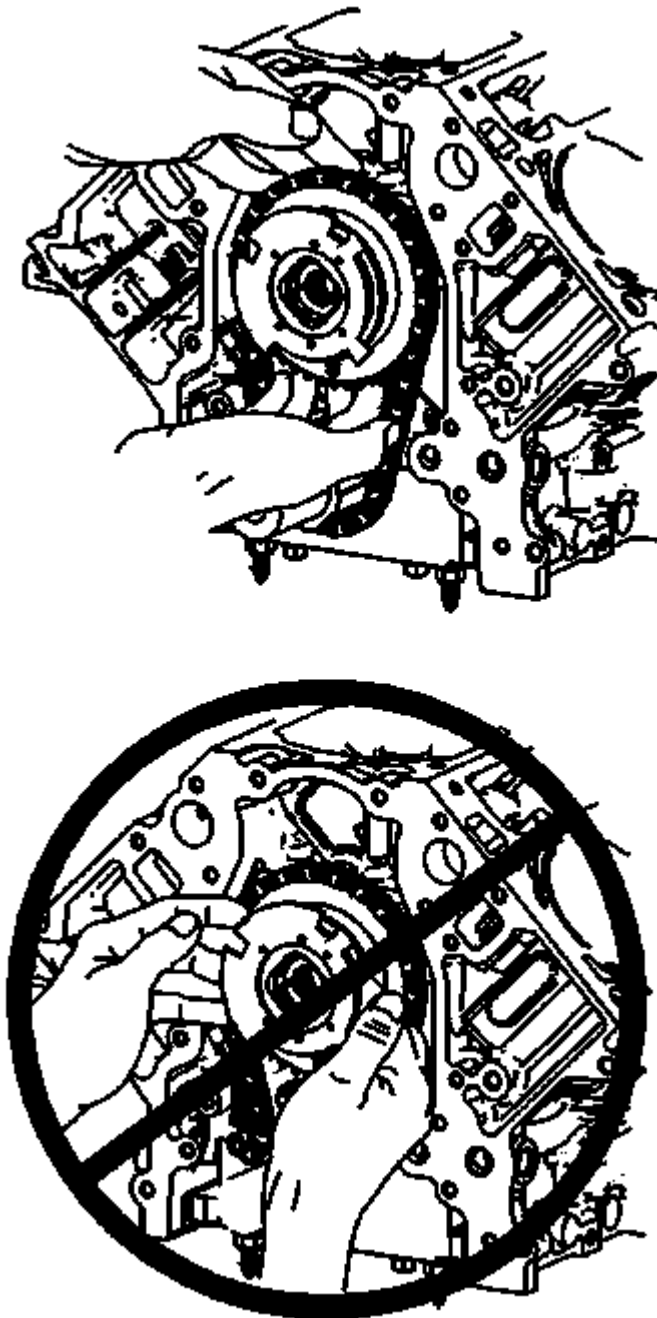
View Of CMP Actuator Alignment Mark & Crankshaft Sprocket Alignment Mark
